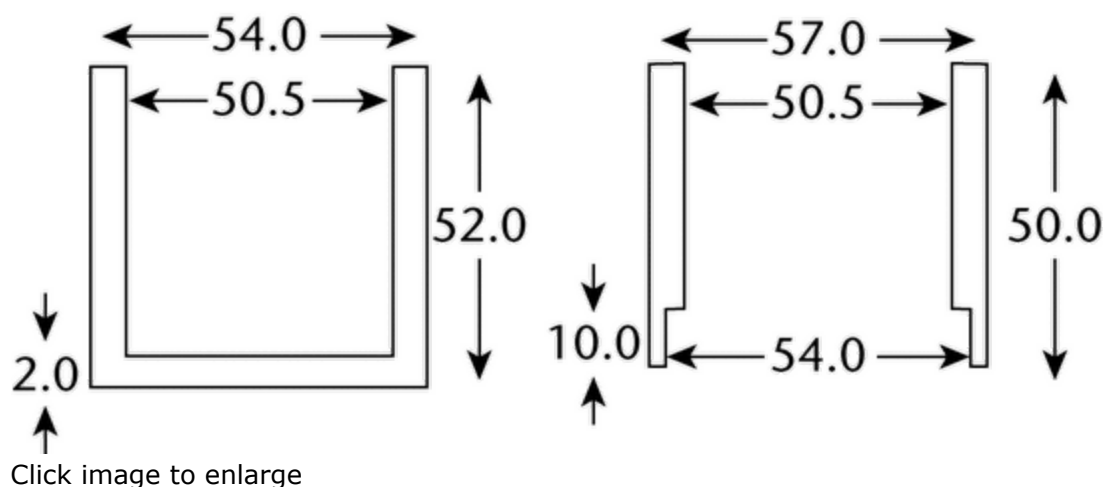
Measuring vessel (left) and cap (right). Dimensions in millimeters.
